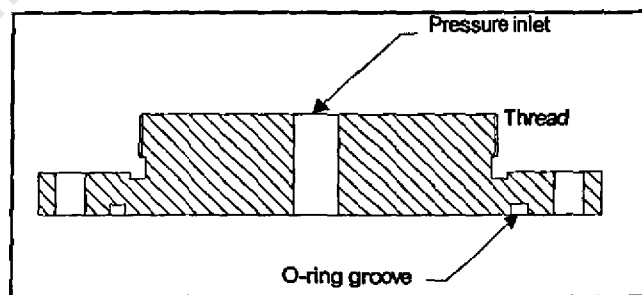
Cross section of redesigned end cap to be bolted to steel base
